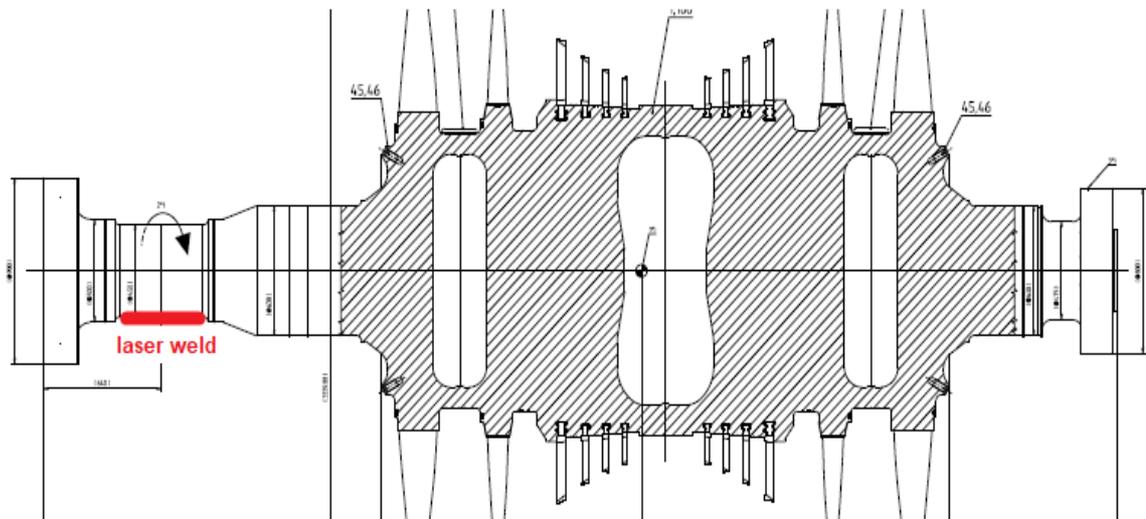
Typical LP Rotor (laser weld journal as indicated in red)
